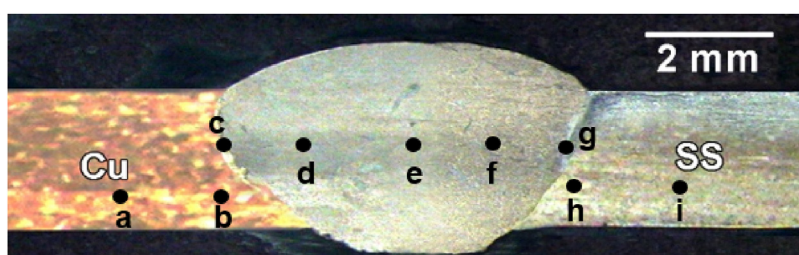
Cross-sectional Macrostructure of the GTAW (Cu–SS) joint showing various weld zones (a) base metal (BM)-copper, (b) HAZ-copper side, (c) copper–weld interface, (d)–(f) fusion zone, (g) weld–stainless steel interface, (h) HAZ–stainless steel side, and (i) BM–stainless steel.
